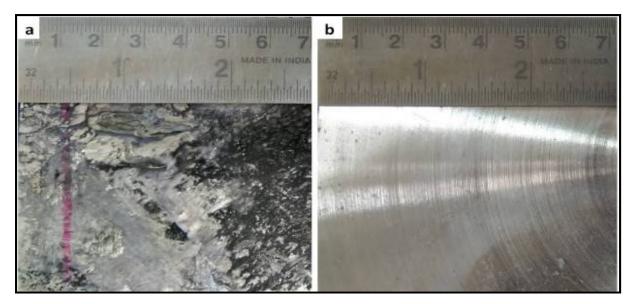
Surface of AS21A alloy casting plate (a) as received; (b) machined
